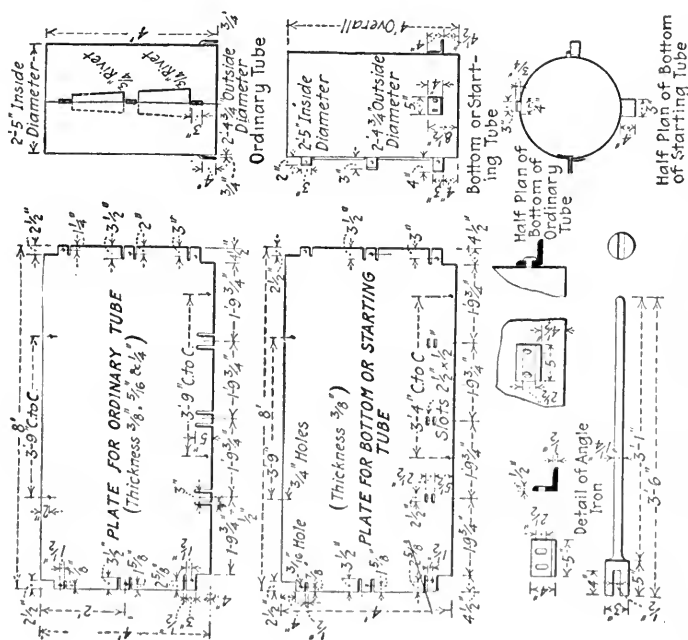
DETAILS OF CONSTRUCTION OF CHUTE SECTIONS,
